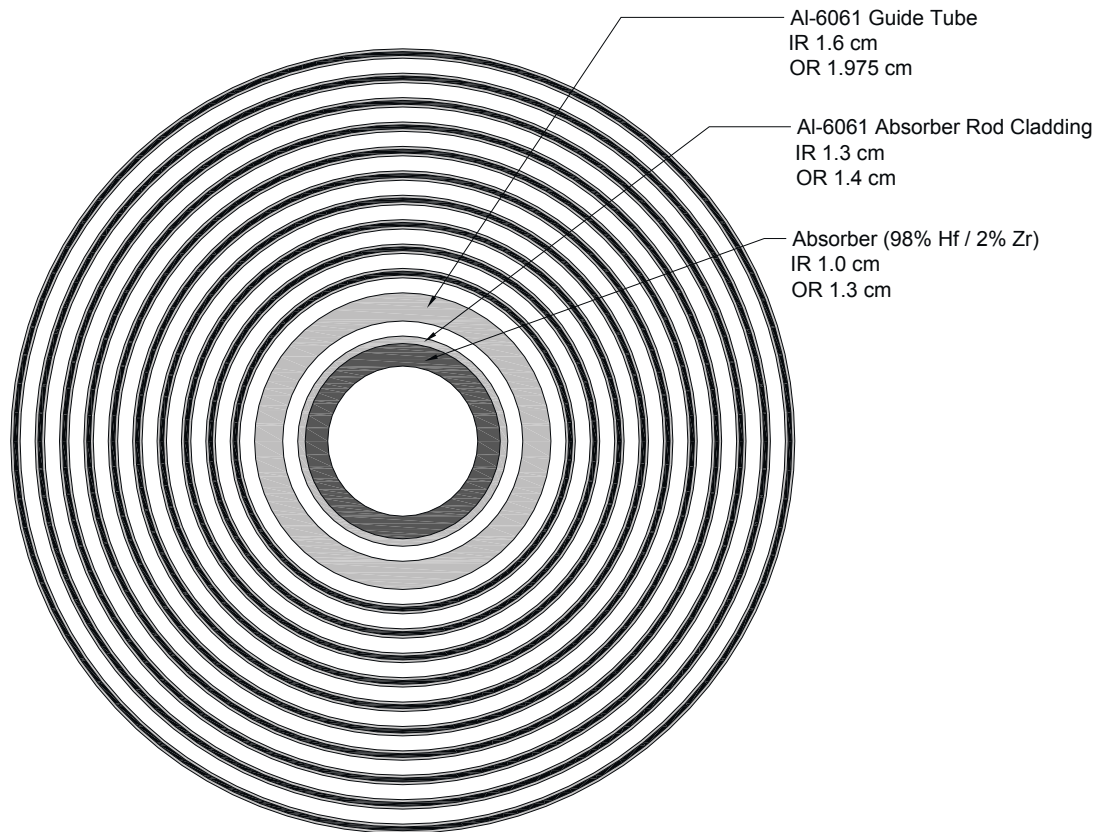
Diagram of possible shim rod design inside Cylindrical fuel assembly.
